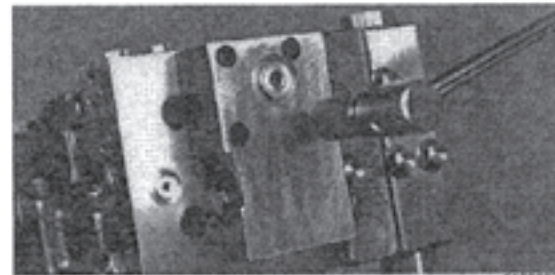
Install E1•E2 or F1•F2 Control Valve Housing
